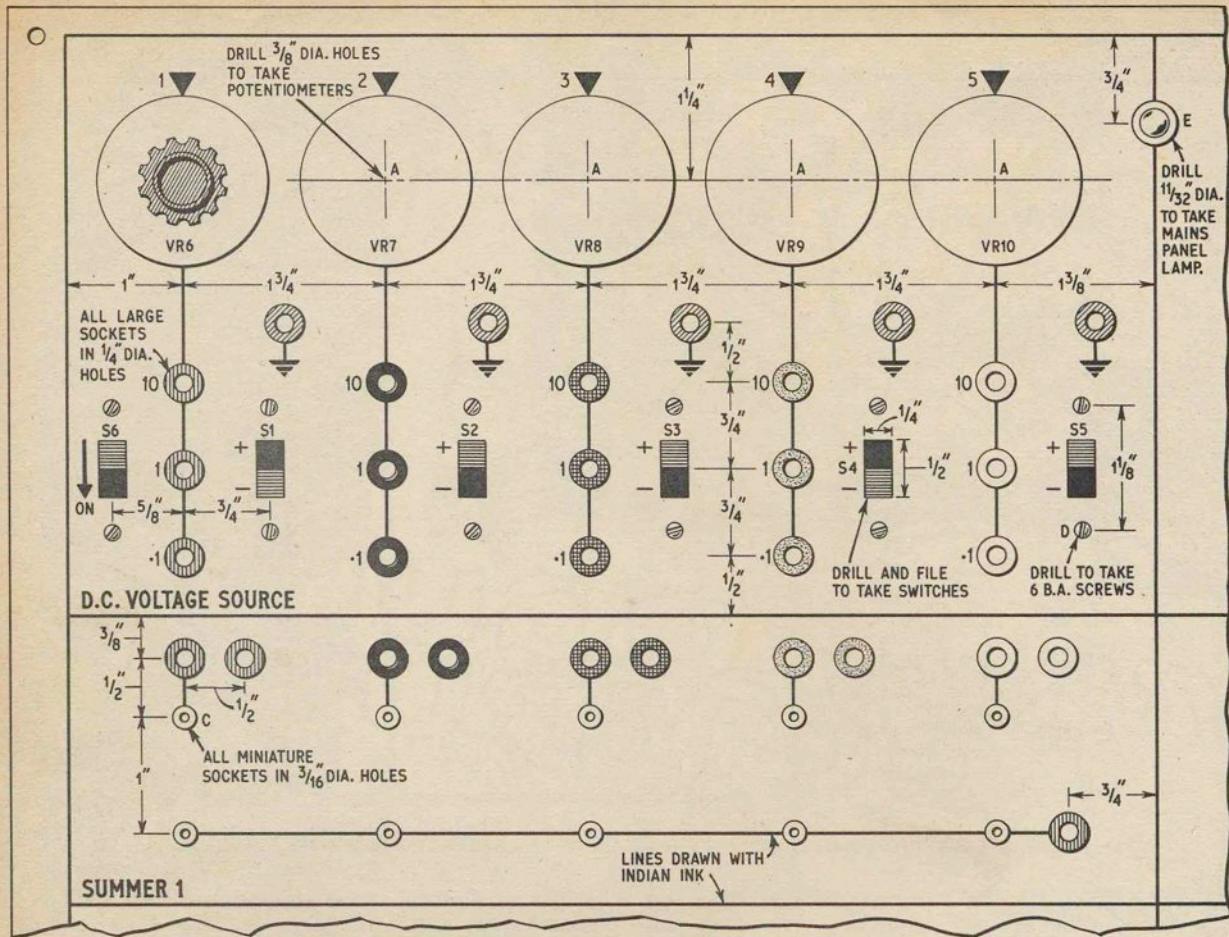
Left-hand portion of front panel. Drilling details, layout of components, and panel engraving. (Below the broken line, there are two further sections, each a replica of "Summer 1")
